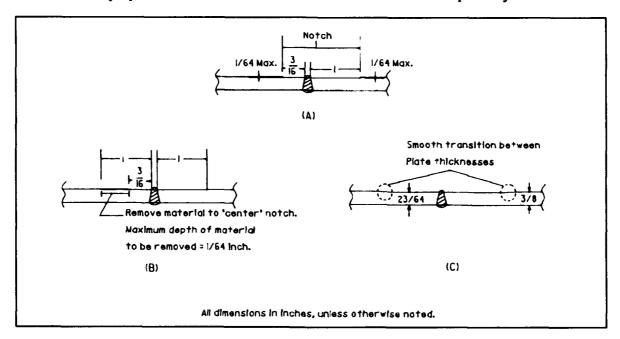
Removal of Notch in Fatigue Plate WW-PL1
